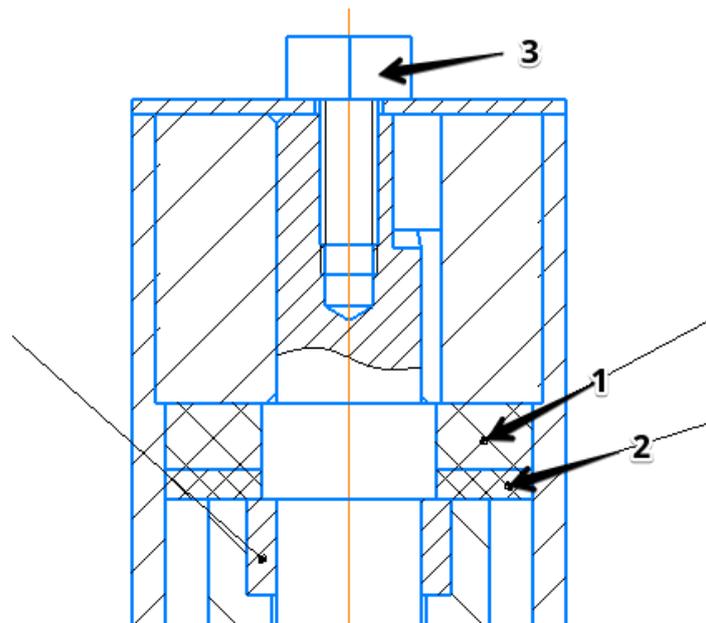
Mixer sealing rings: 1 – PTFE ring; 2 – Rubber sealing ring; 3 – Fixing screw bolt
